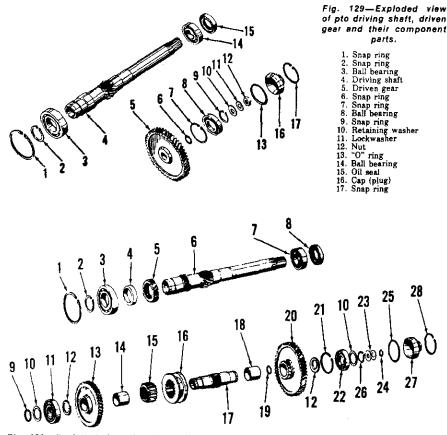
Exploded view of dual speed pto driving shaft, pto countershaft and their component parts used on some Series 354, 364 and 384 tractors.
